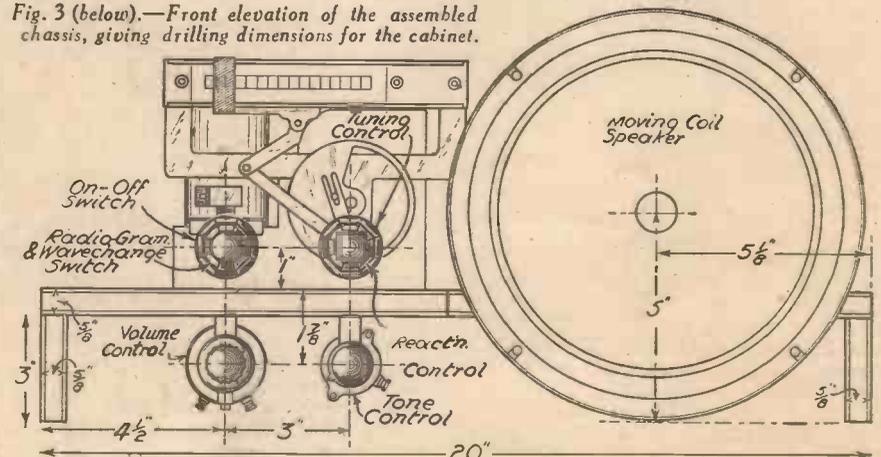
(below).—Front elevation of the assembled chassis, giving drilling dimensions for the cabinet.
